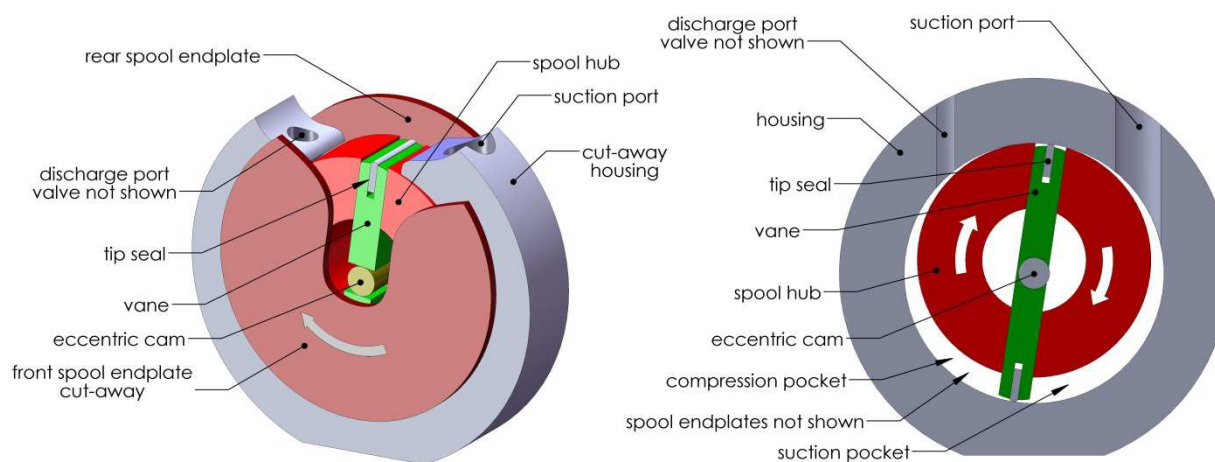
Cutaway view of rotating spool compressor mechanism with key components highlighted.
